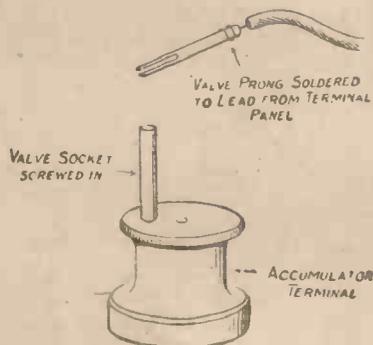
Detail of Accumulator Terminal with Valve-socket Connector.
